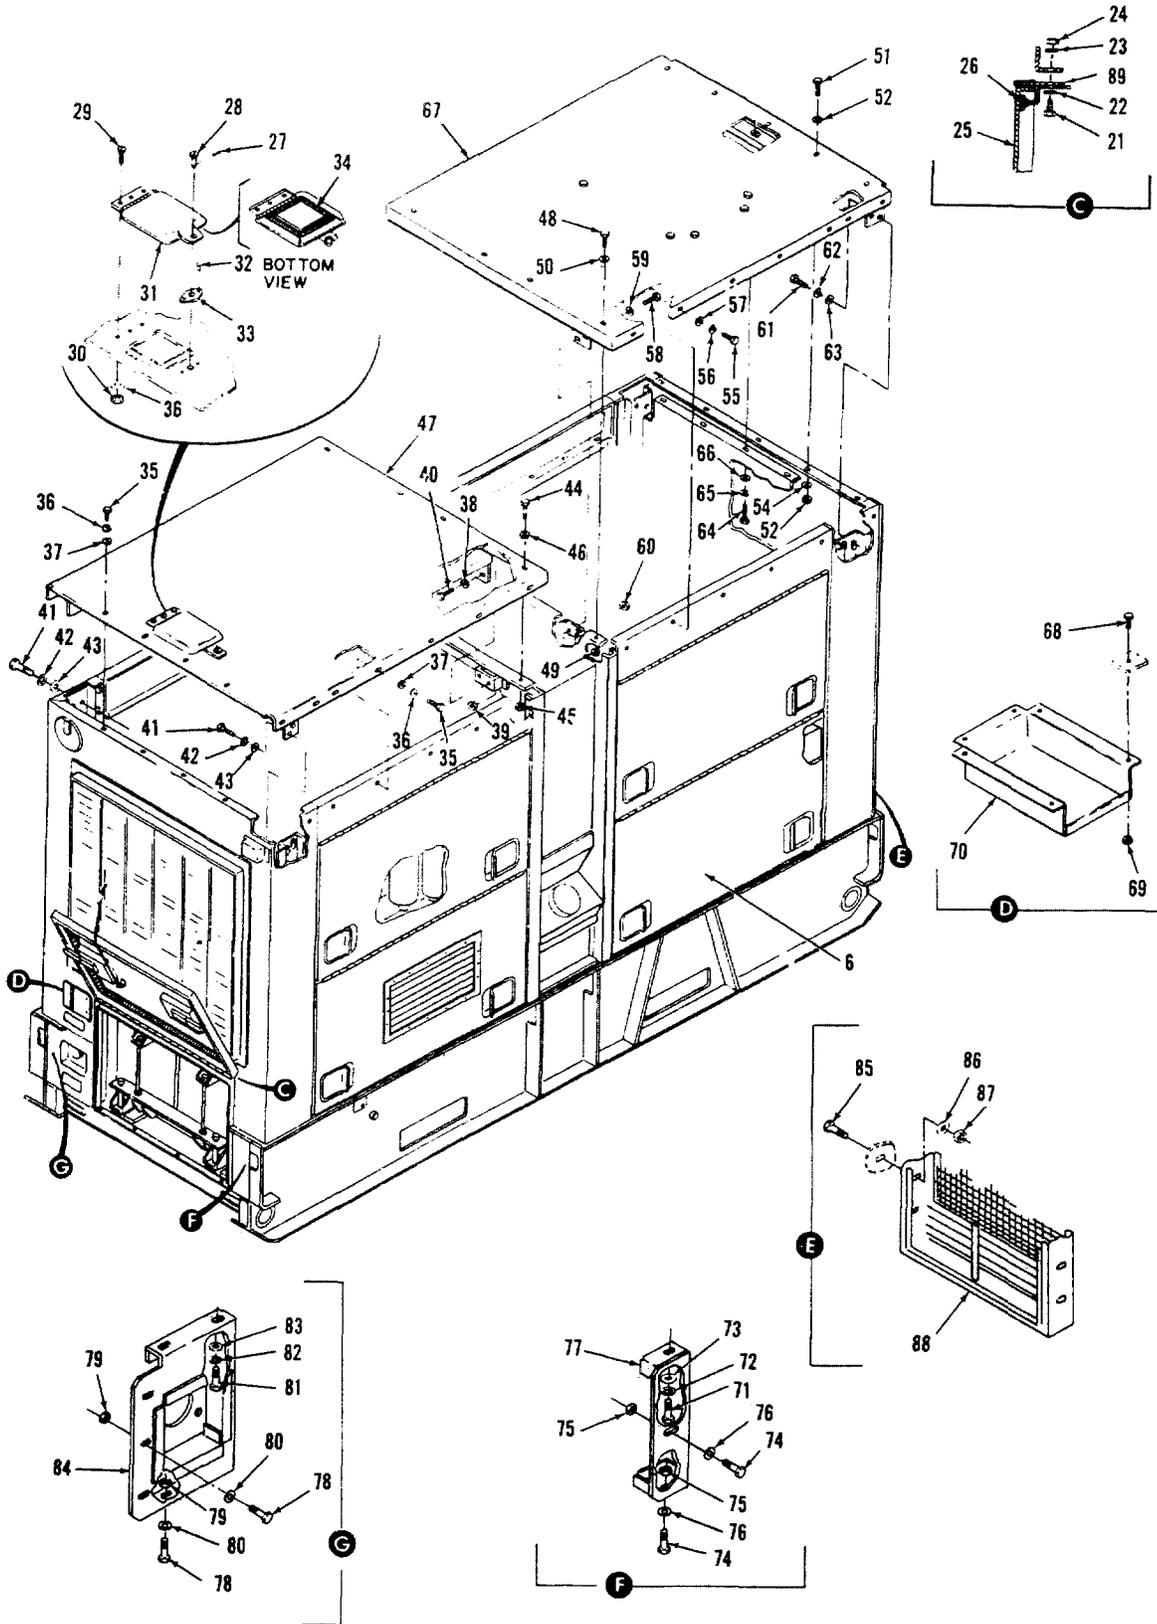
Housing, Exploded View (Sheet 2 of 2)
